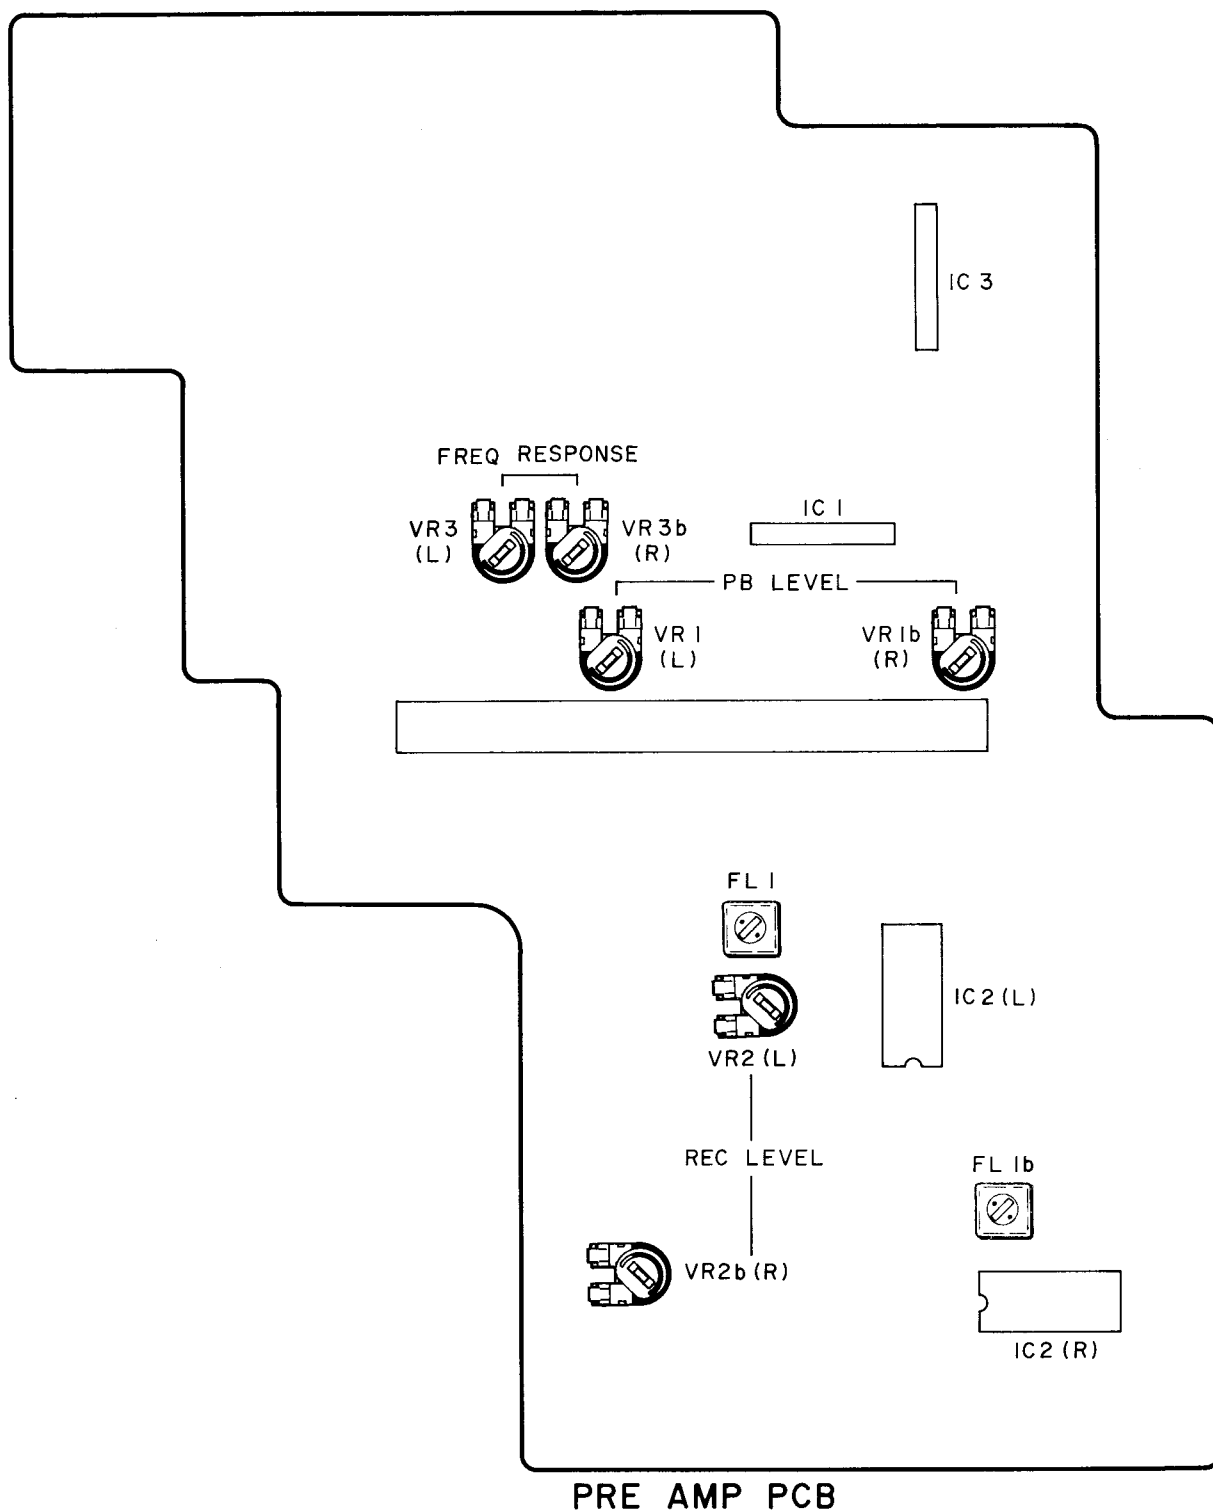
PRE-AMP PCB ADJ POINTS
